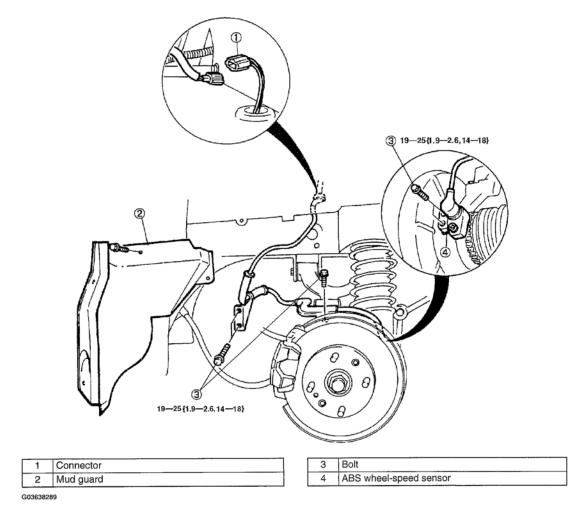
Exploded View Of Rear ABS Wheel-Speed Sensor & Torque Specifications Courtesy of MAZDA MOTORS CORP.
